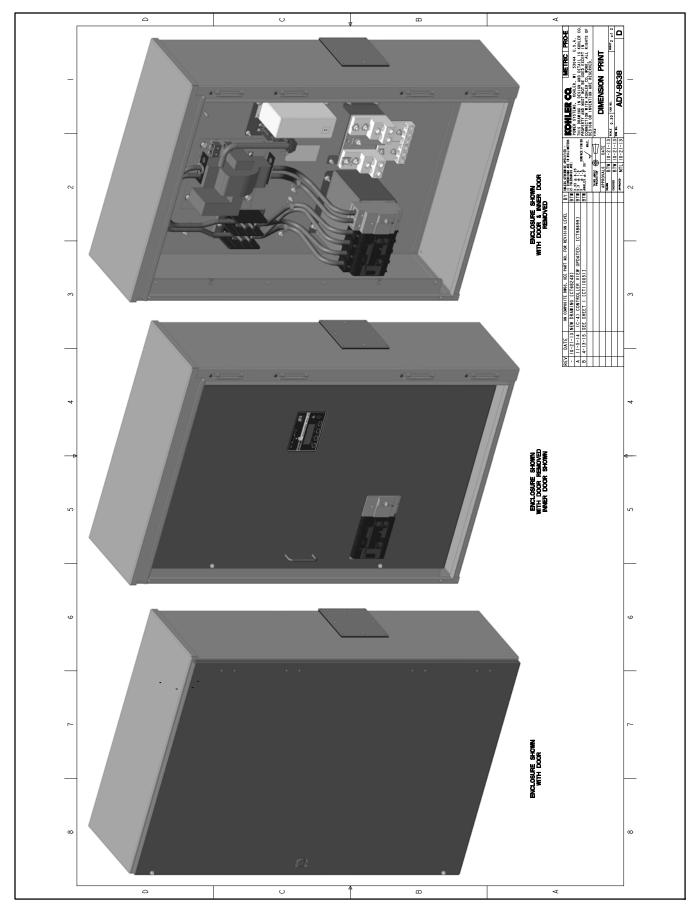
Transfer Switch Dimension Drawing, ADV-8638, Sheet 2
